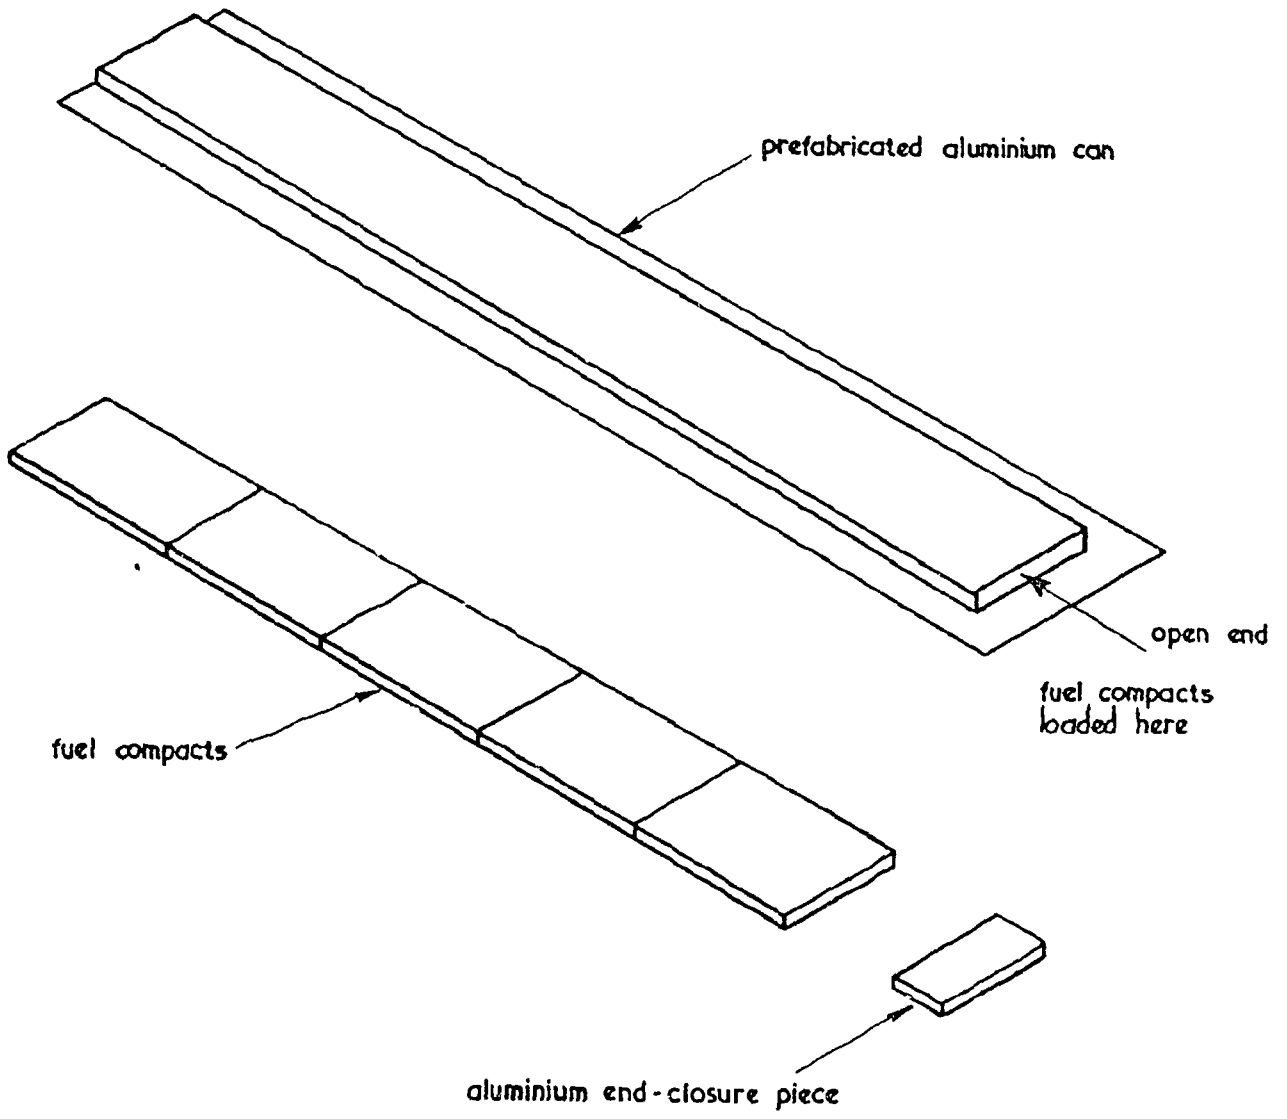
METHOD OF ASSEMBLY OF FUEL PLATES
